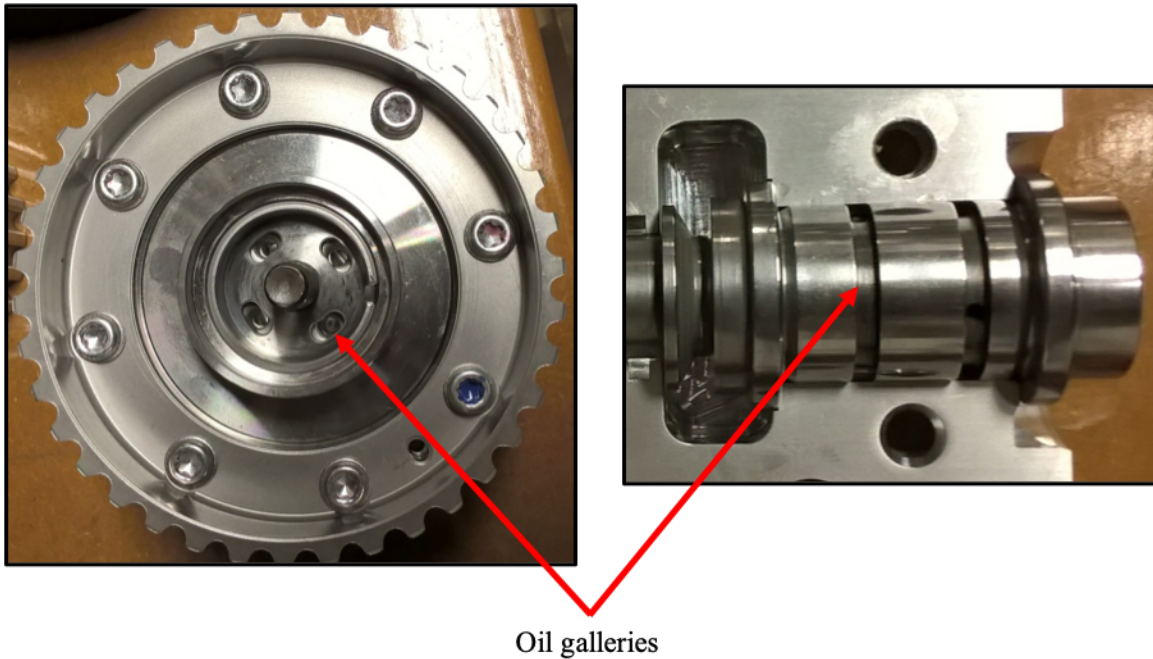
Oil gallery ports in the pulley (left) and oil passages in the camshaft (right).
